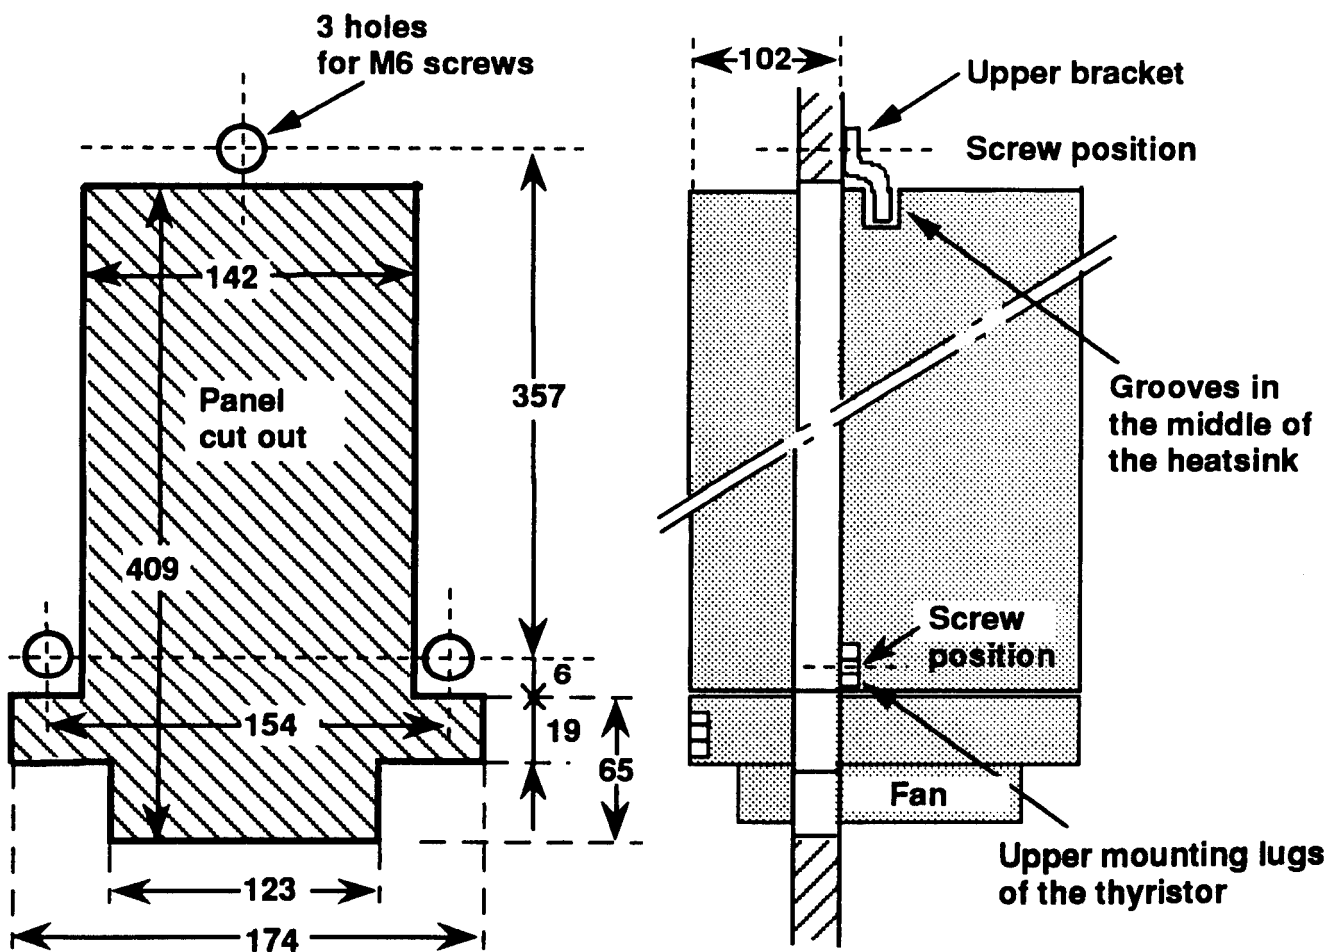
Drilling dimensions, panel cut-out and mounting of a convection cooled unit, through panel mounting
